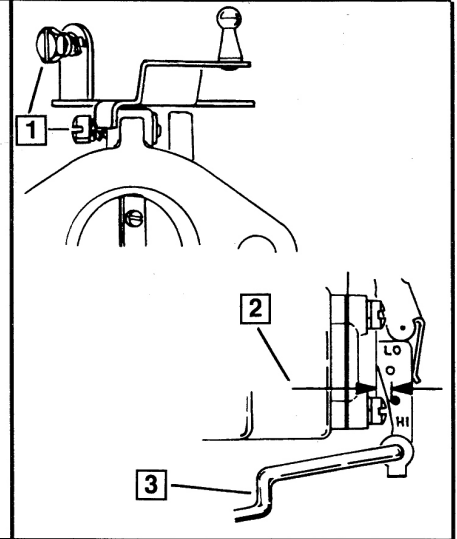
CHOKE VALVE PULL-DOWN ADJUSTMENT Carb. Model 1100 (Auto. Choke)
